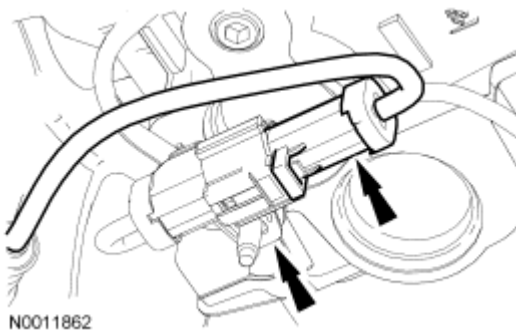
Locating Heated Oxygen Sensor (HO2S) Electrical Connector
